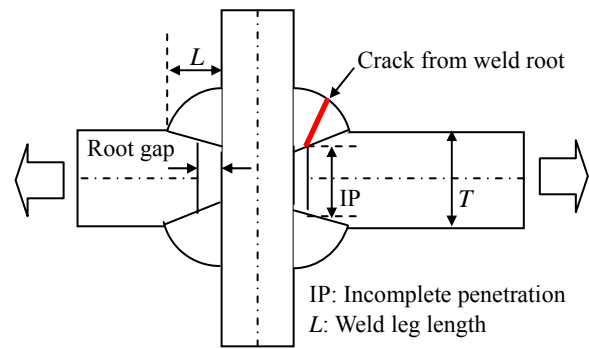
Crack from weld root of load carrying cruciform welded joint
